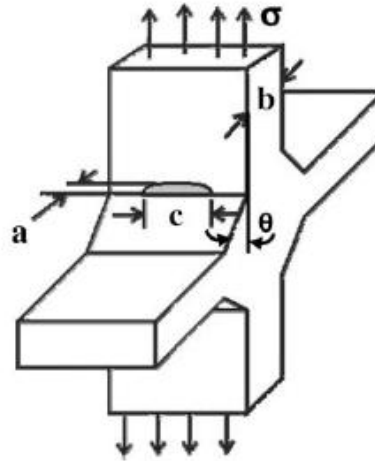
Semi-elliptical crack in double fillet weld
